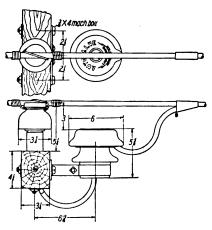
Side and Top Views of 2500-Volt Arrester with Form H Mounting Bracket
